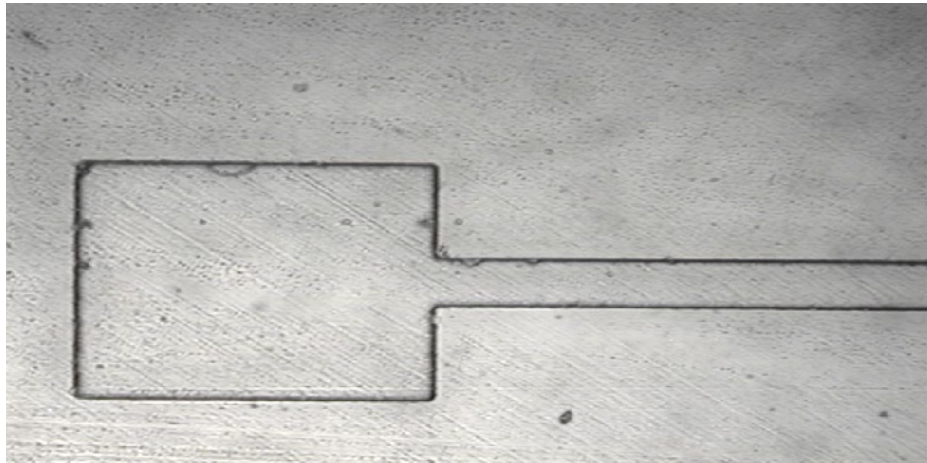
Shown is a microscope picture of a cast epoxy channel obtained by open casting.
